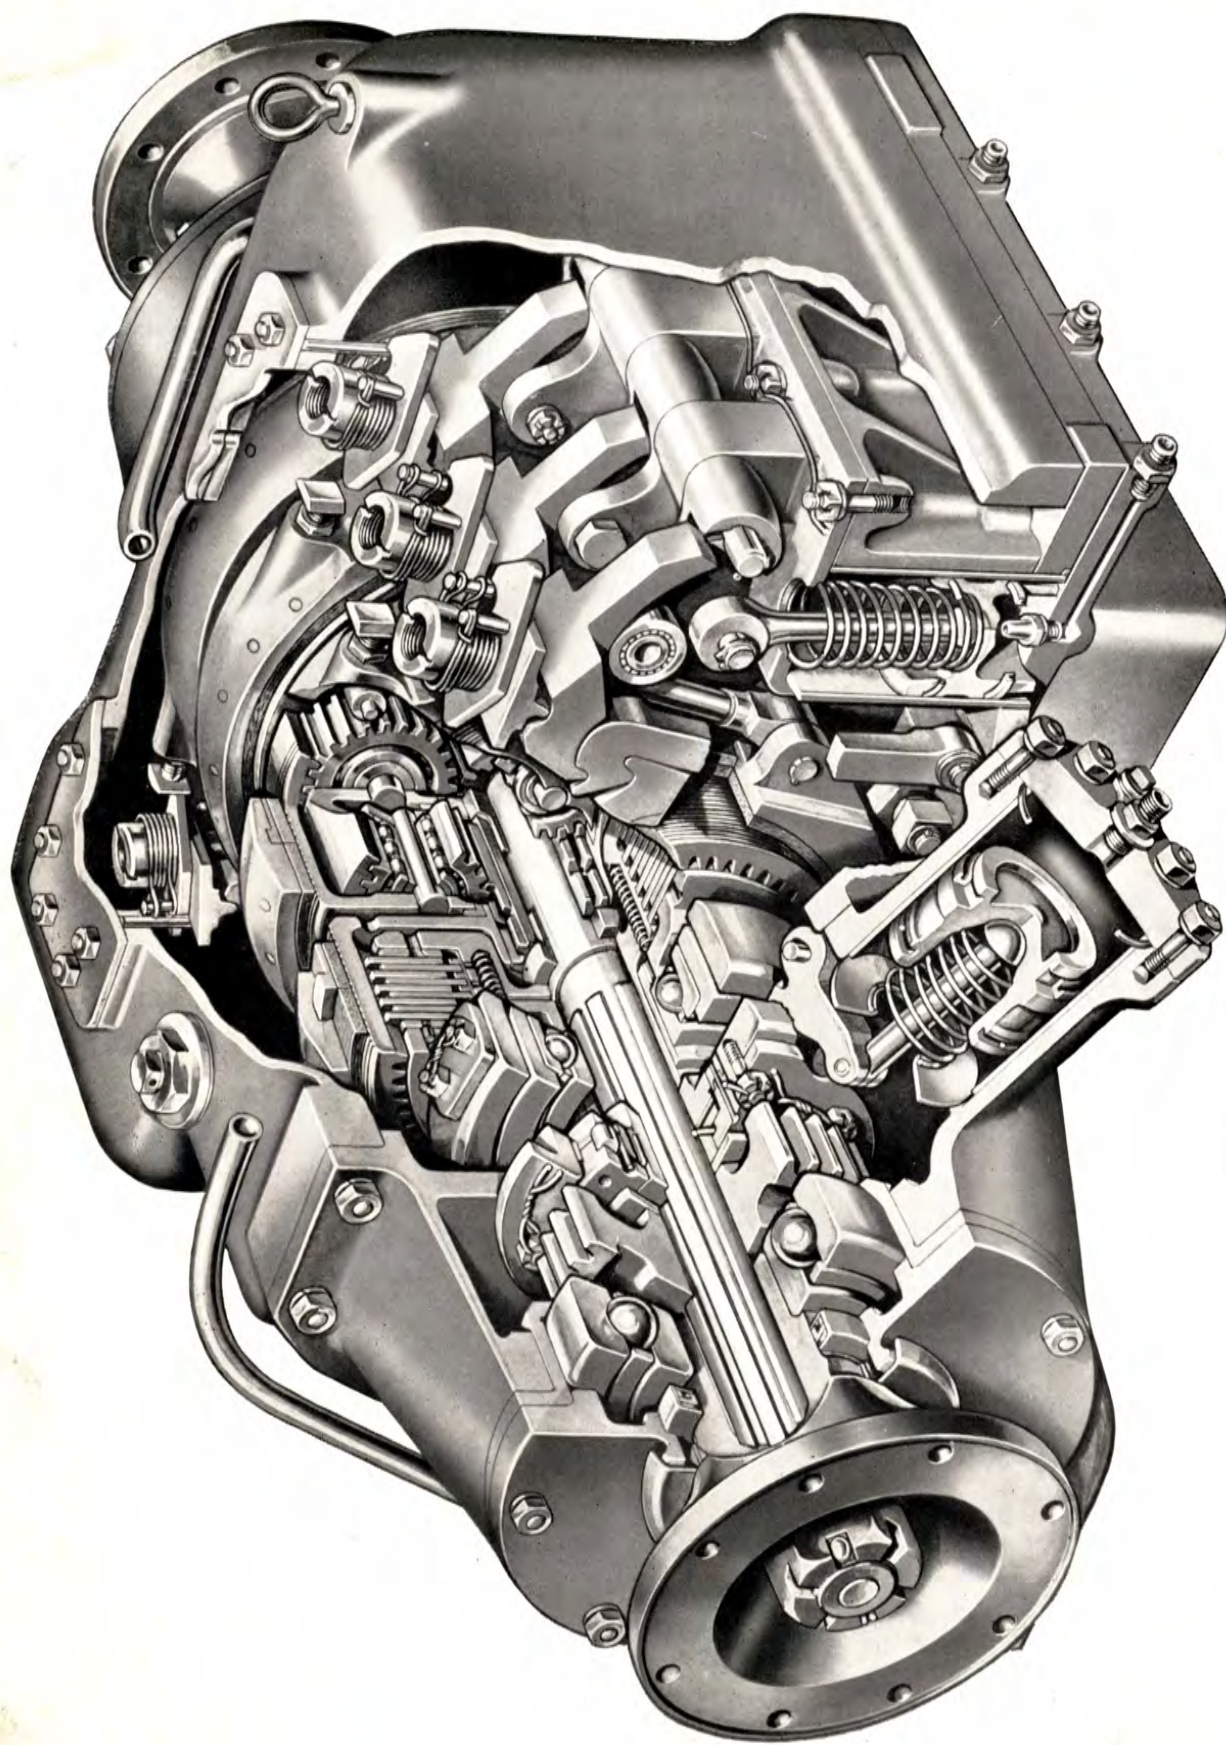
CUT-AWAY VIEW OF THE GEARBOX
